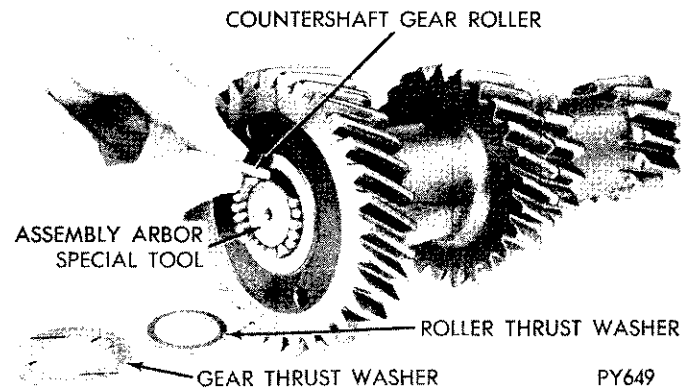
Countershaft Gear—Roller Bearing Assembly
